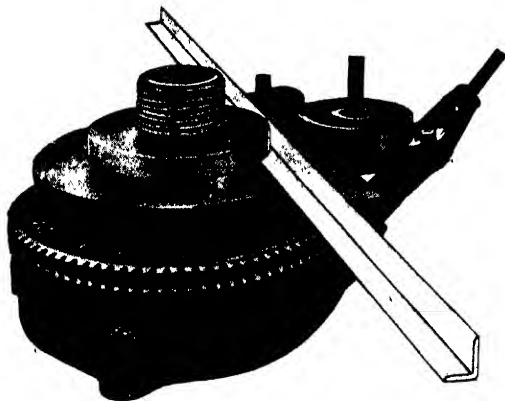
SET-UP FOR BENDING ANGLE SECTION WITH THE WEB INSIDE
